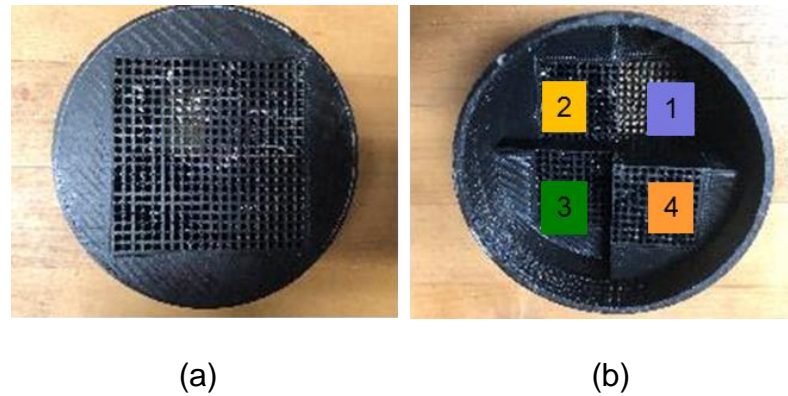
3D printed RPRR2. (a) front view, (b) back view.
